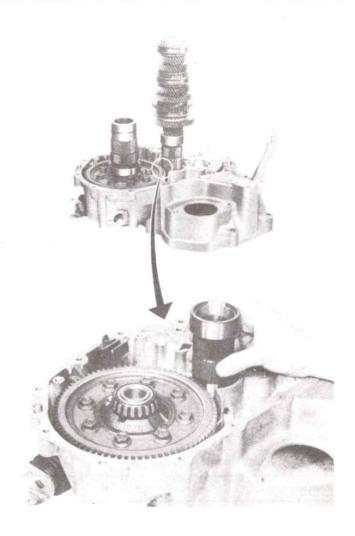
Fitting the adjusters (make sure the flat portion faces the crownwheel) (Sec 9)
